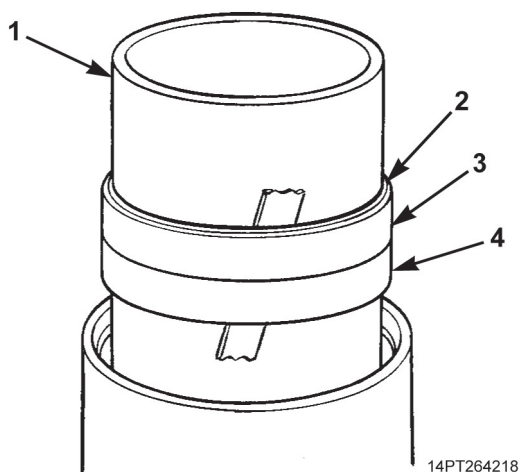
Wiper, Wiper Retainer, and Seal Removal.
